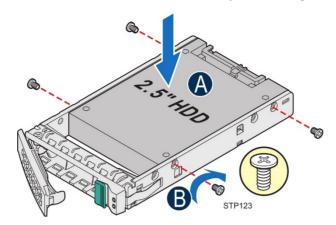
2.5" Storage Device Installation – Mounting the Drive to the Carrier
